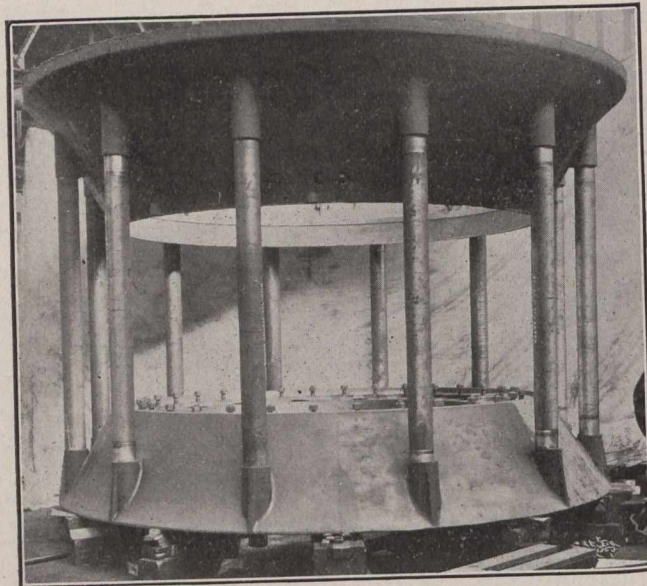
Turbine Rings and Supporting Columns. Shop View.
